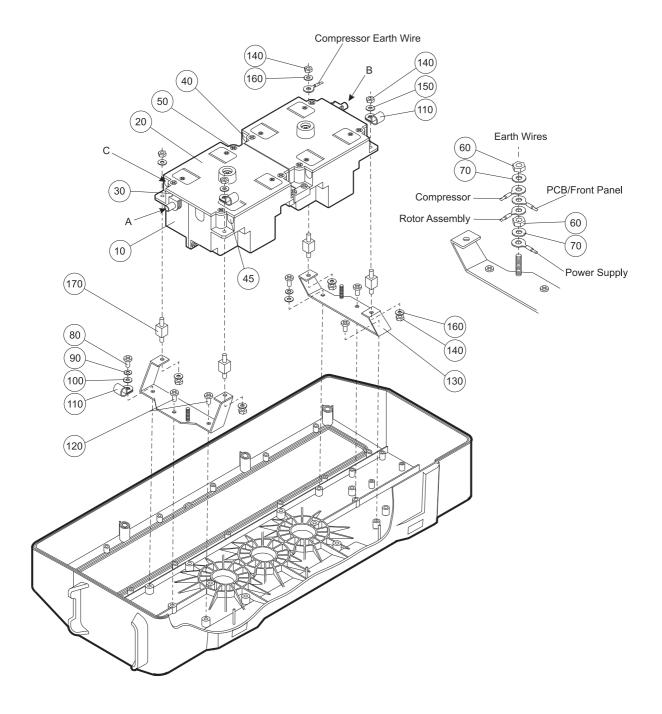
Remove the Double Compressor Assembly and Disassemble the AV mounts
